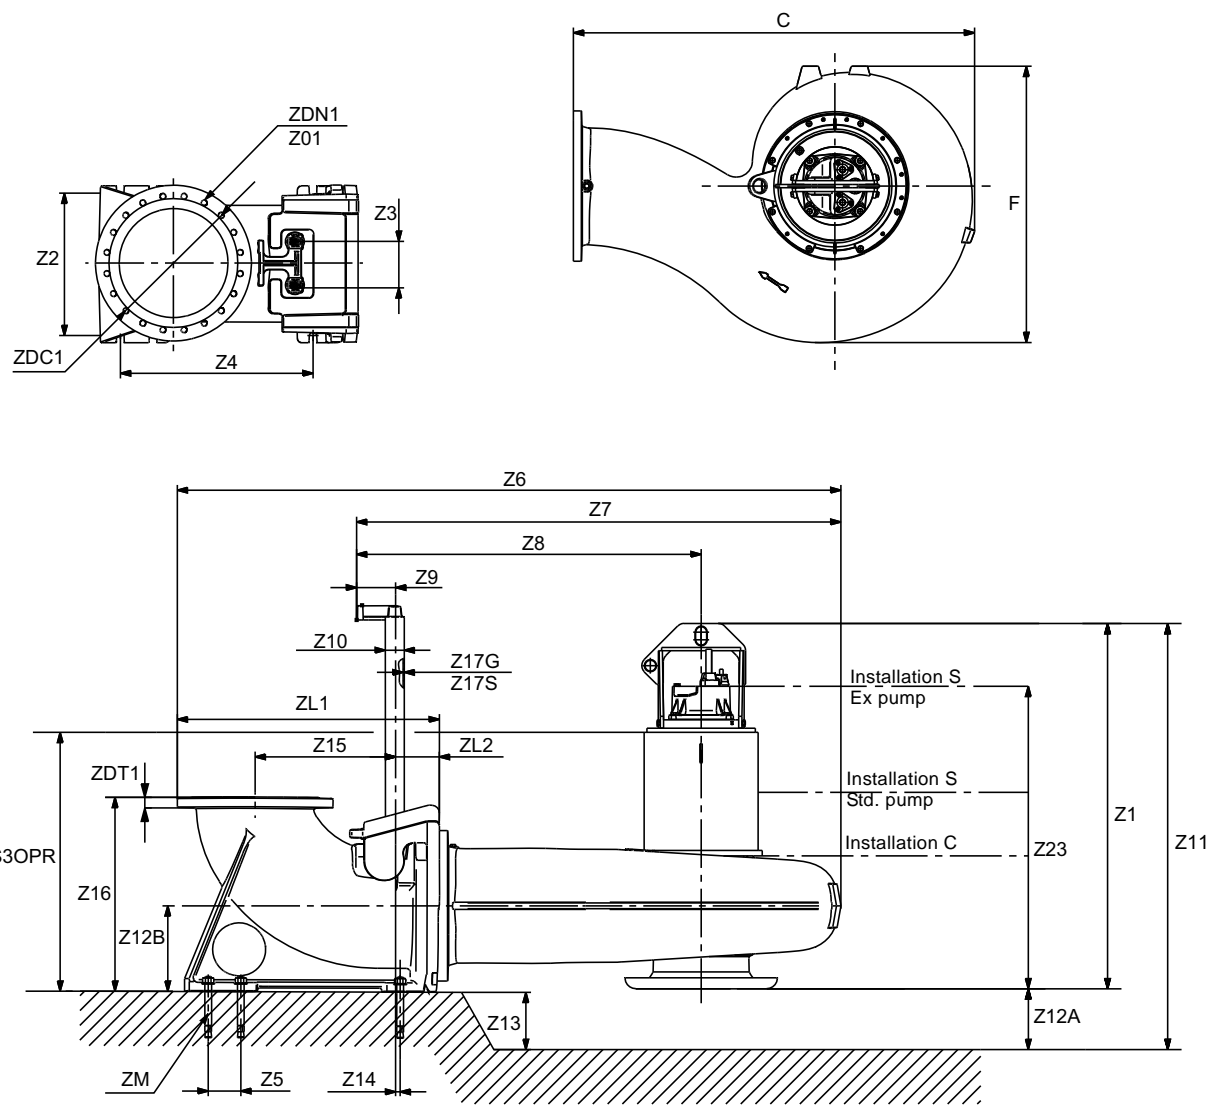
Installation on auto-coupling system - version 2 (base unit with 6 anchor bolts)
